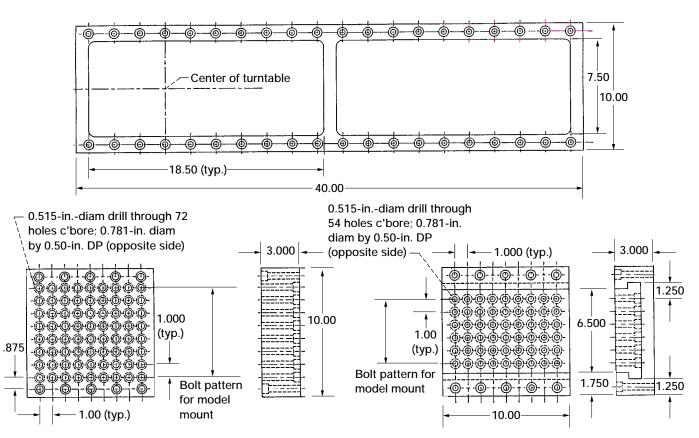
IRT force-balance lower model mount (all dimensions are given in inches; typ. = typical).
